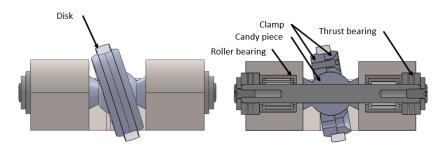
Frontal plane view of the spring with a tilted cam follower. The disk, clamps and candy piece are pointed out. The internal geometry of the spring is also visible.
